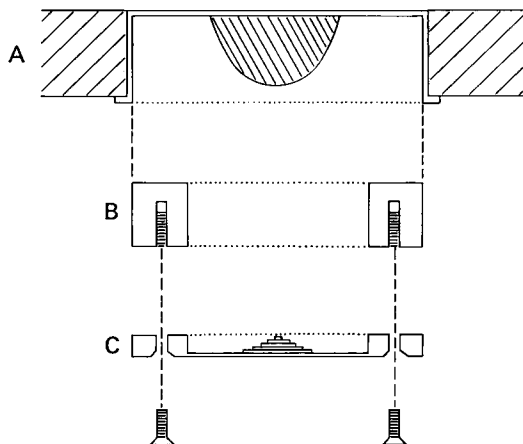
Mounting of auxiliary filter. A) Turret with flattening filter. B) Split ring. C) Auxiliary filter.
